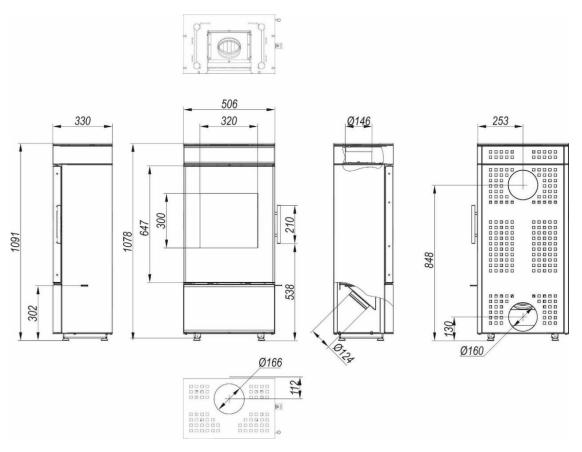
Dimensions (in mm) of the DEFRO HOME CERES heating stove.
